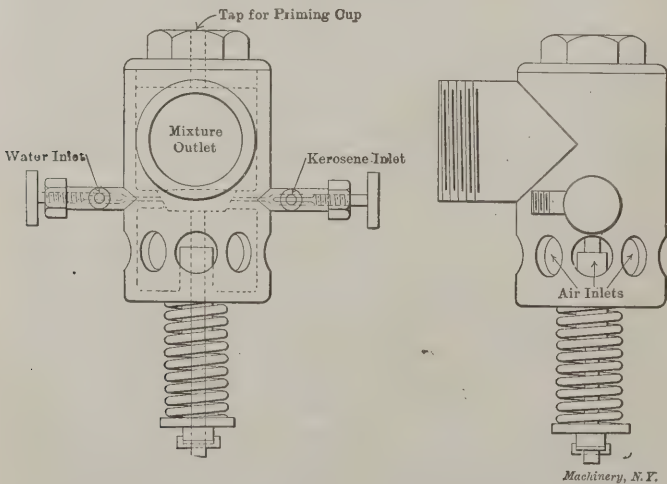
Mixing Valve for Kerosene Oil used in Gasoline Engines.
